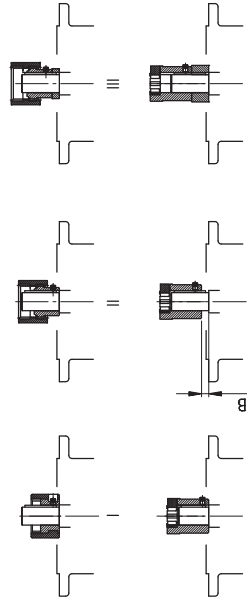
Fitting the coupling onto the motor shaft - various types of coupling
